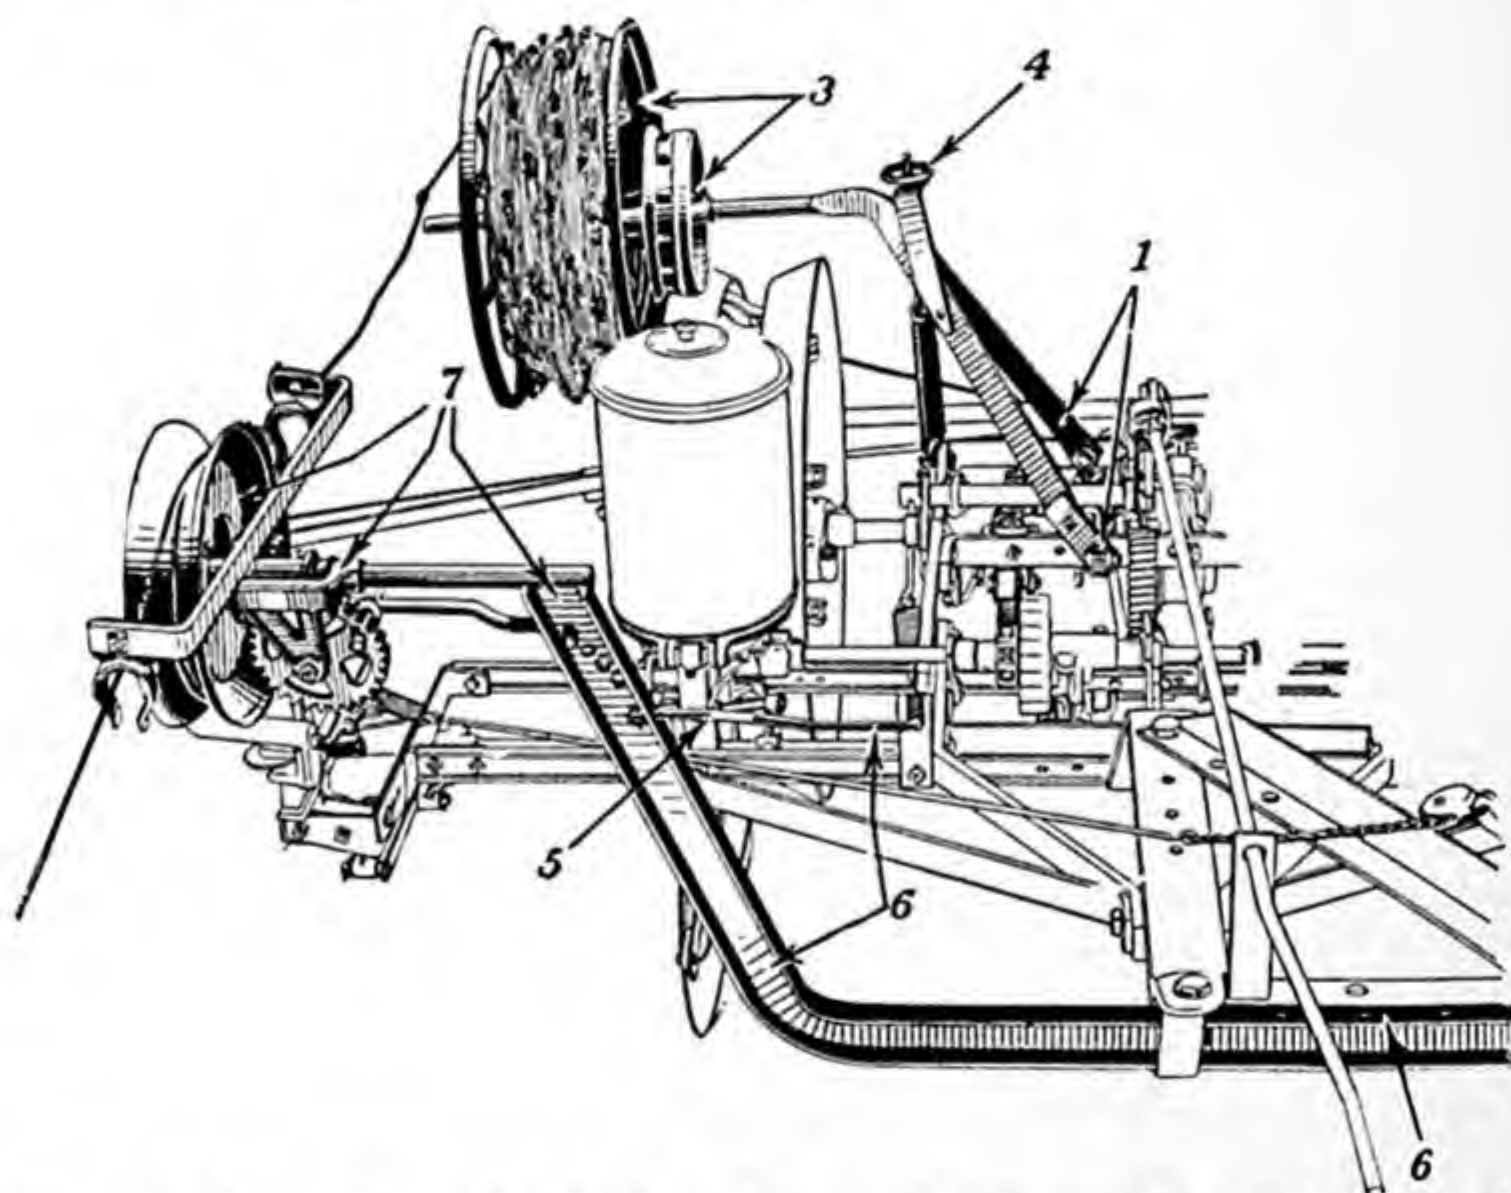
Check-row wire reel and wire-guide assembly in position for taking up wire for tractor planter.
